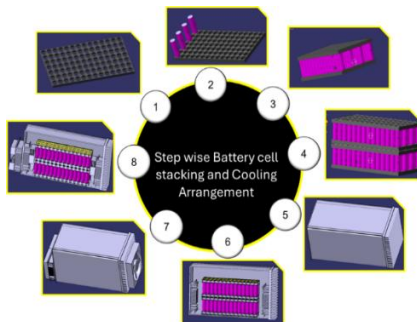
Step-wise -designing of holder, battery pack module, aluminum casing with fins, and all cooling arrangement within the available space in CAD
